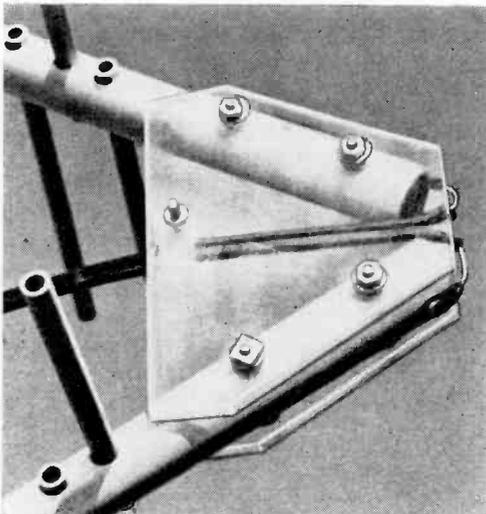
The nose assembly fastens together with $\frac{1}{4}$ - $20 \times 2\frac{1}{2}$ " hardware, cable clamp with 6-32 hardware.
